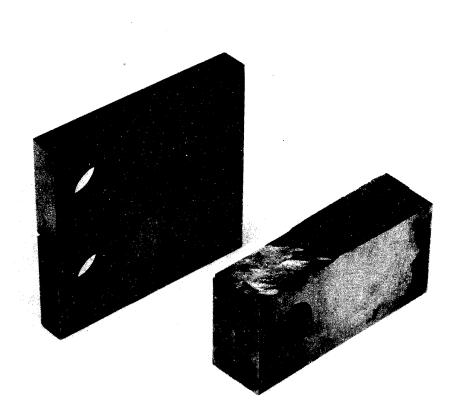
COMPACT TENSION SPECIMENS BEFORE AND AFTER TESTING
